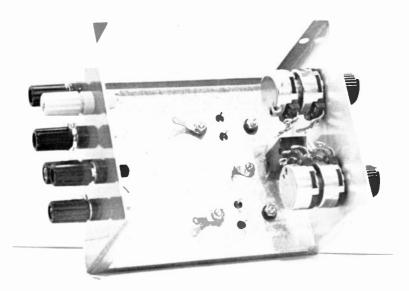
Parts are mounted in the holes and tightly secured so that solder work and wiring can begin.
